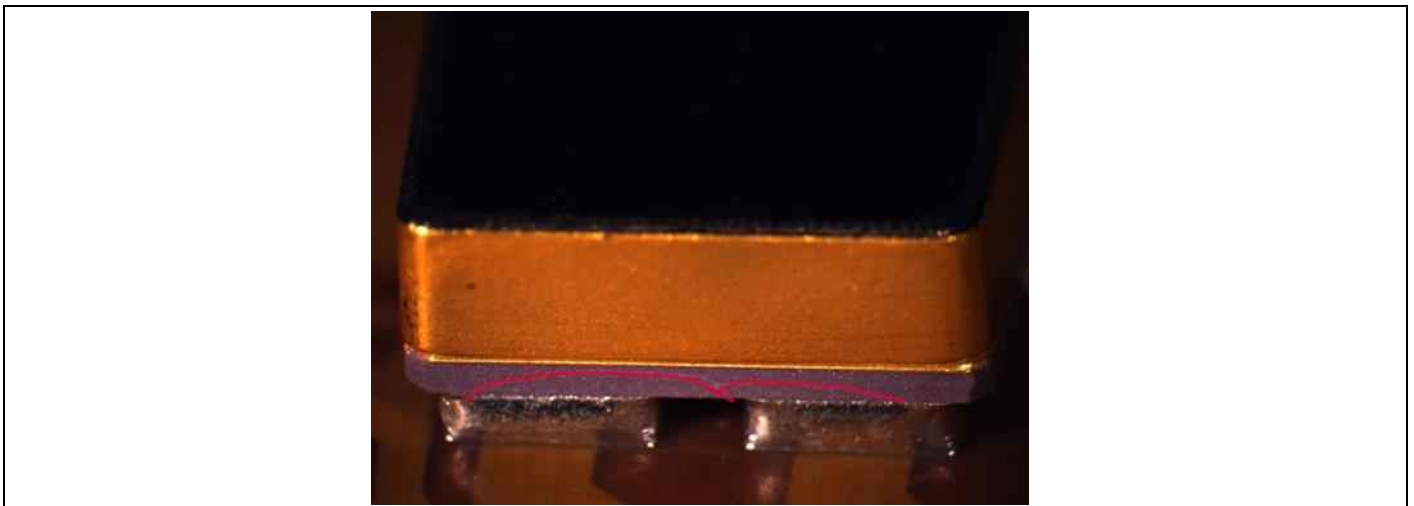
IR HiRel surface mount device on polyimide circuit board (cracks delineated in red)
